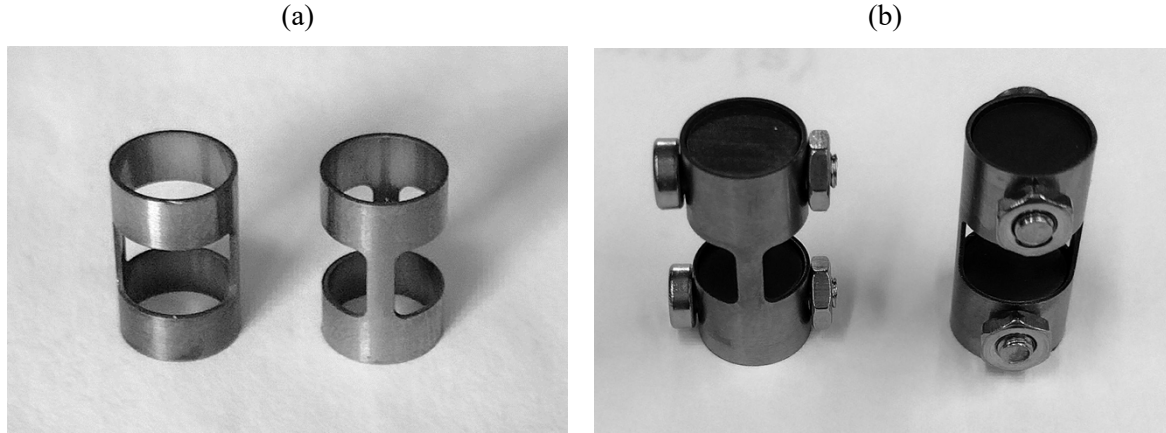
Digital images of each type of dual gauge specimens fabricated from the thin wall tube of C26M2. (a) initial design, (b) fully assembled modified design.
